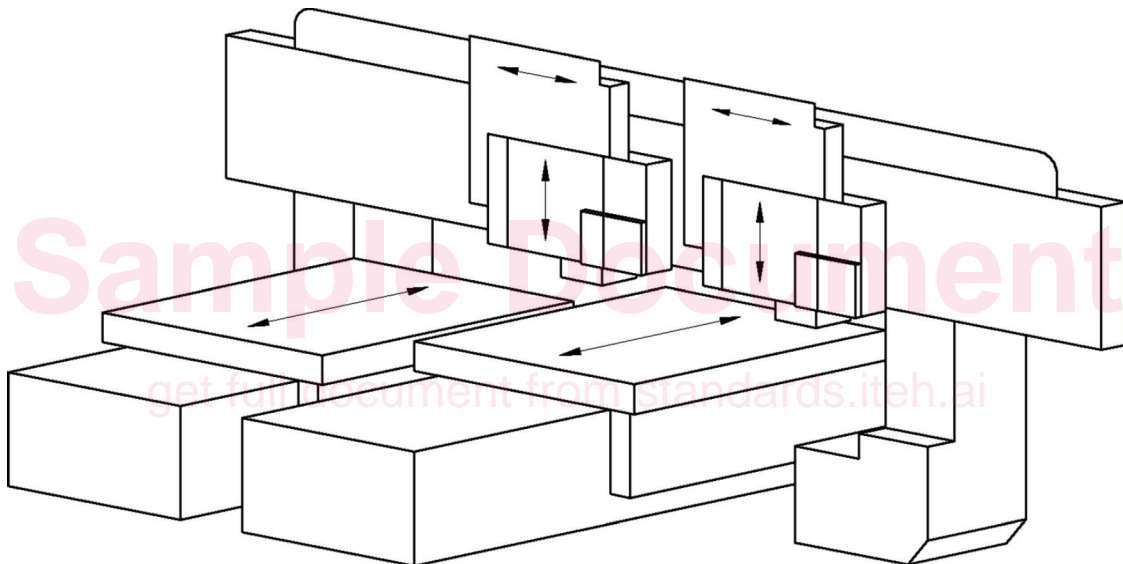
Example of portal frame machine with moving tables, fixed portal, moving machining heads
